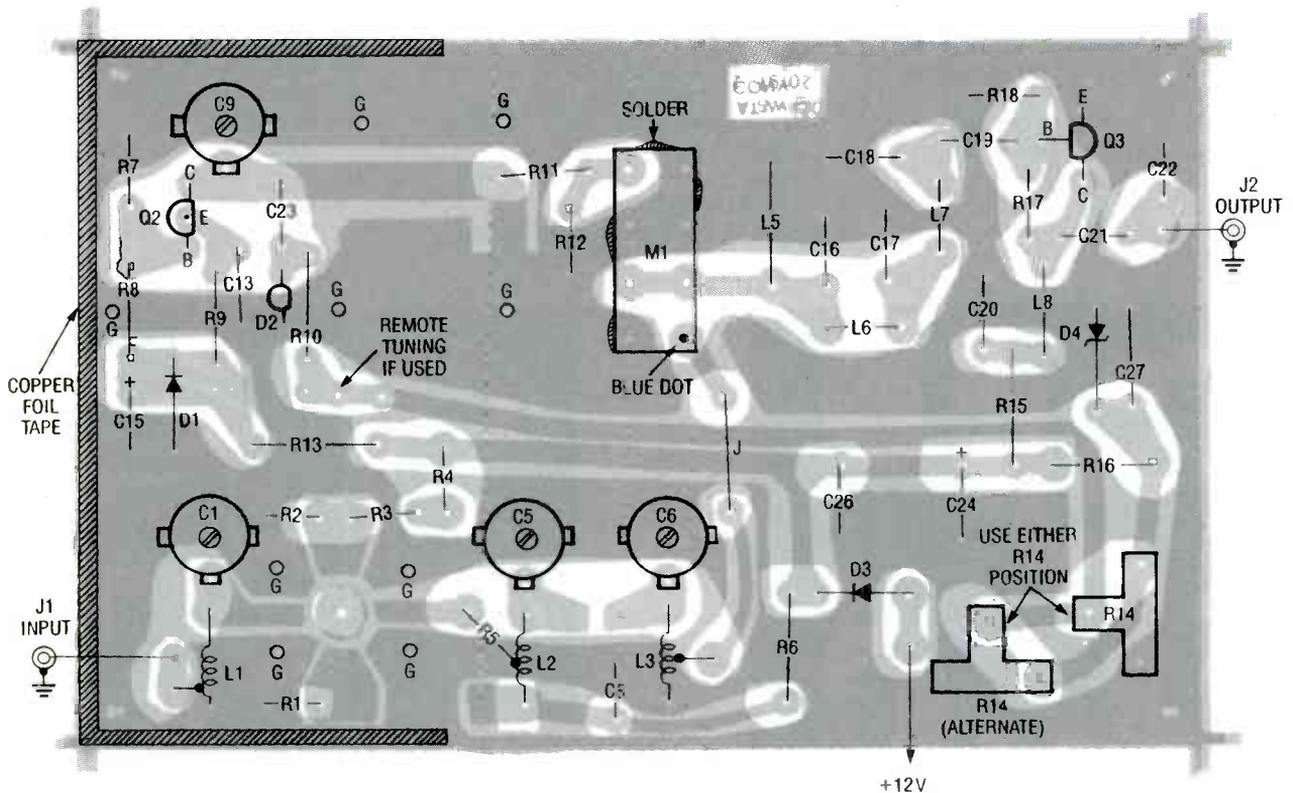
PARTS-PLACEMENT DIAGRAM. This layout must be followed exactly to duplicate the performance of the downconverter. Some components mount on the solder side of the board as shown in Fig. 6.
